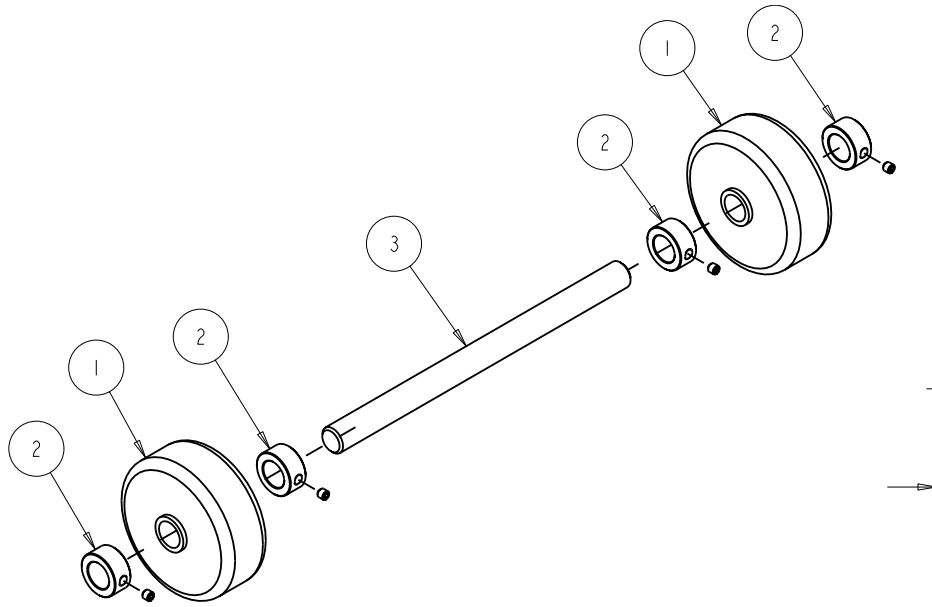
PARTS LIST: MK-CX3 LESS ENGINE - P/N 165974
